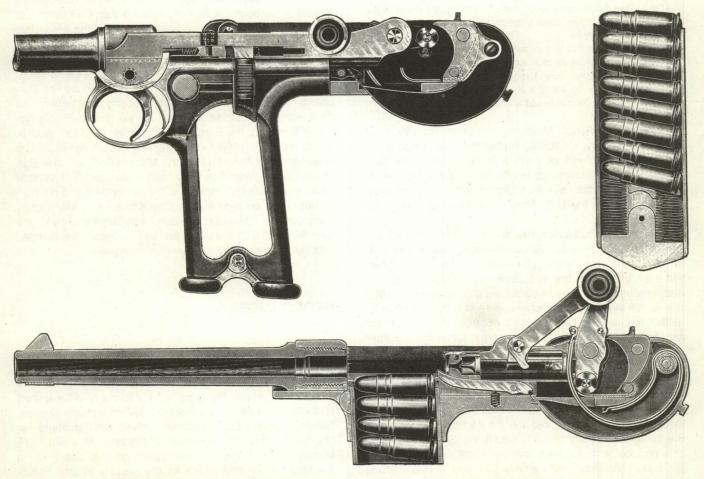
A sectional view of the 1893 Borchardt pistol operating mechanism. (Smith)
